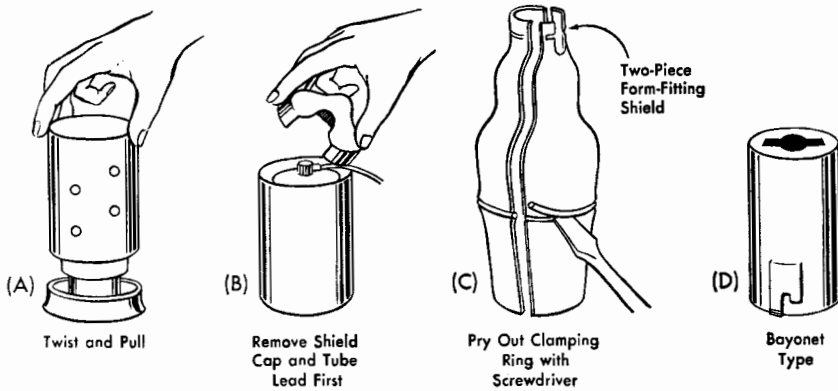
Methods of removing tube shields. To remove bayonet-type shields, push down and turn just as when removing bayonet-type auto lamps or pilot lamps
